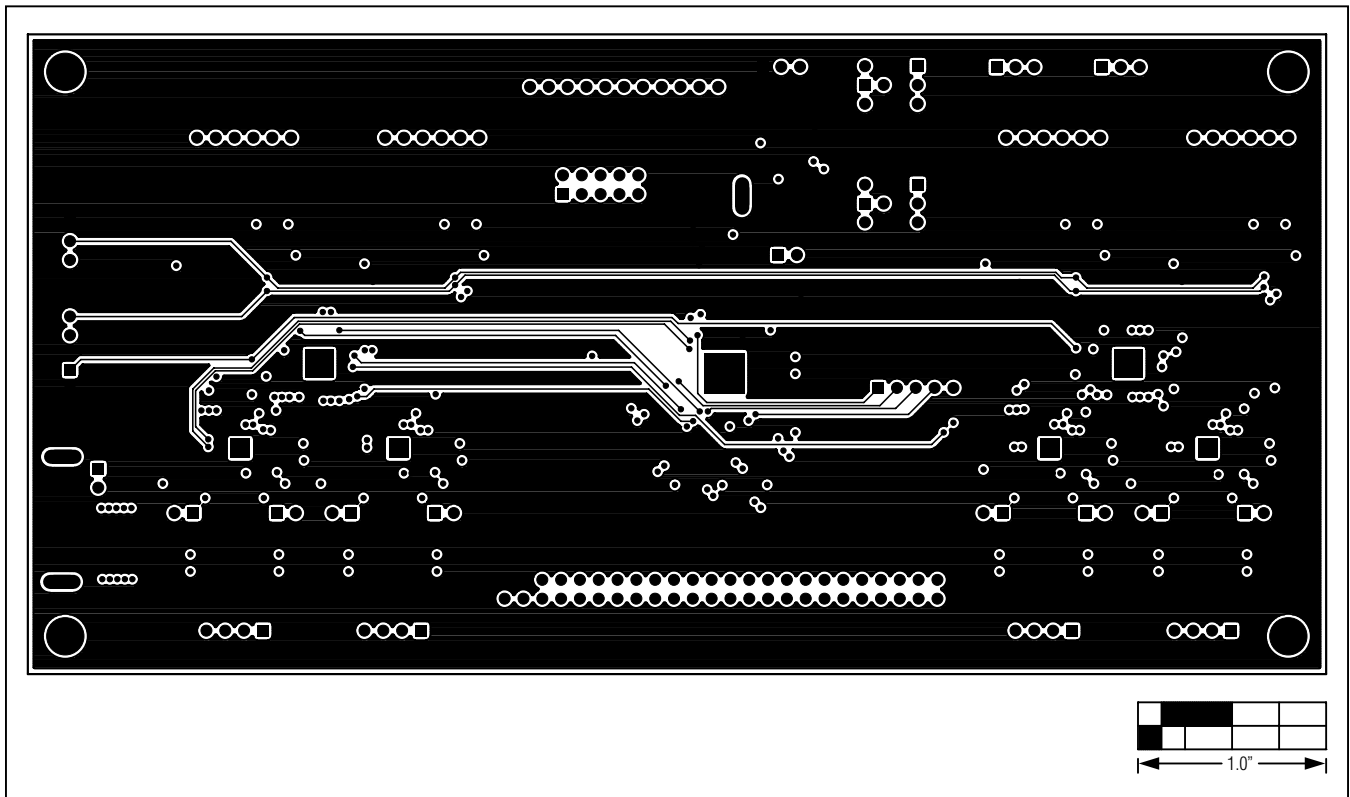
MAX14830 EV Kit PCB Layout—PWR Layer 3
